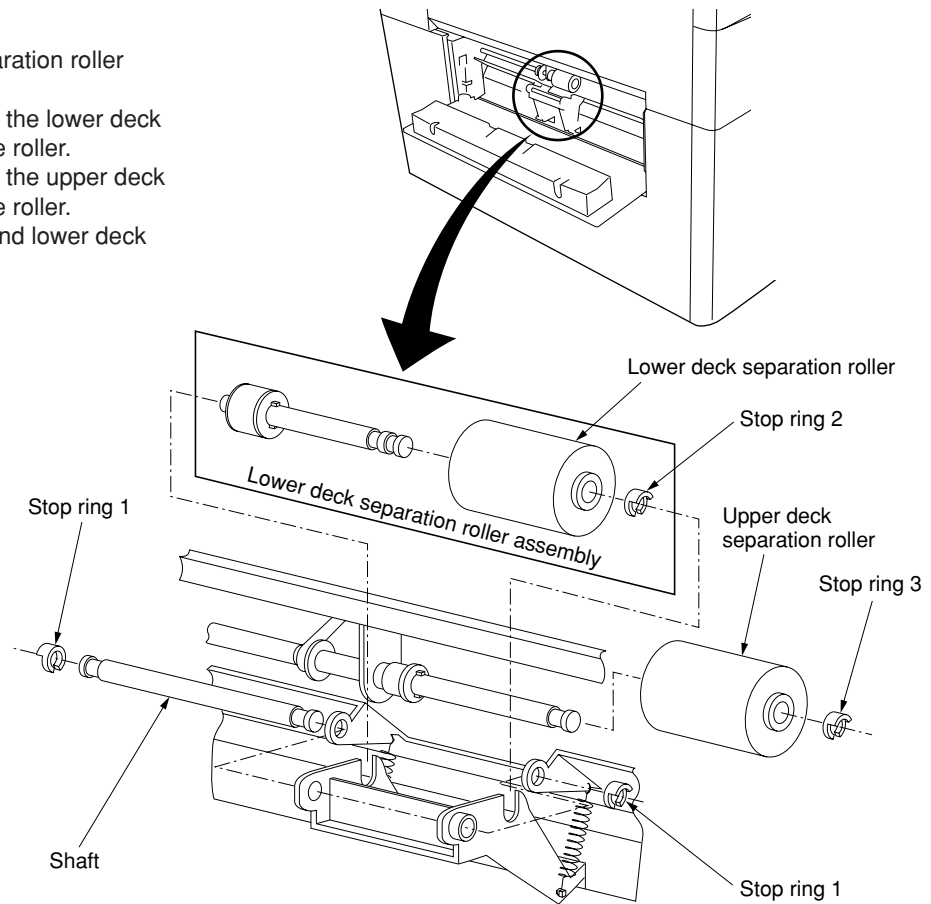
Detaching and refitting the upper and lower deck separation rollers
